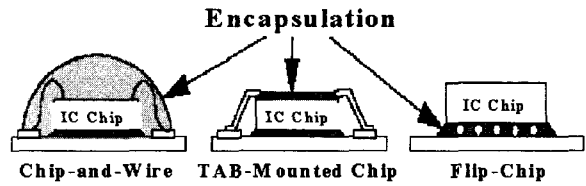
Schematic of Three Major Mounting Techniques of IC Chip using Soldering Technique
